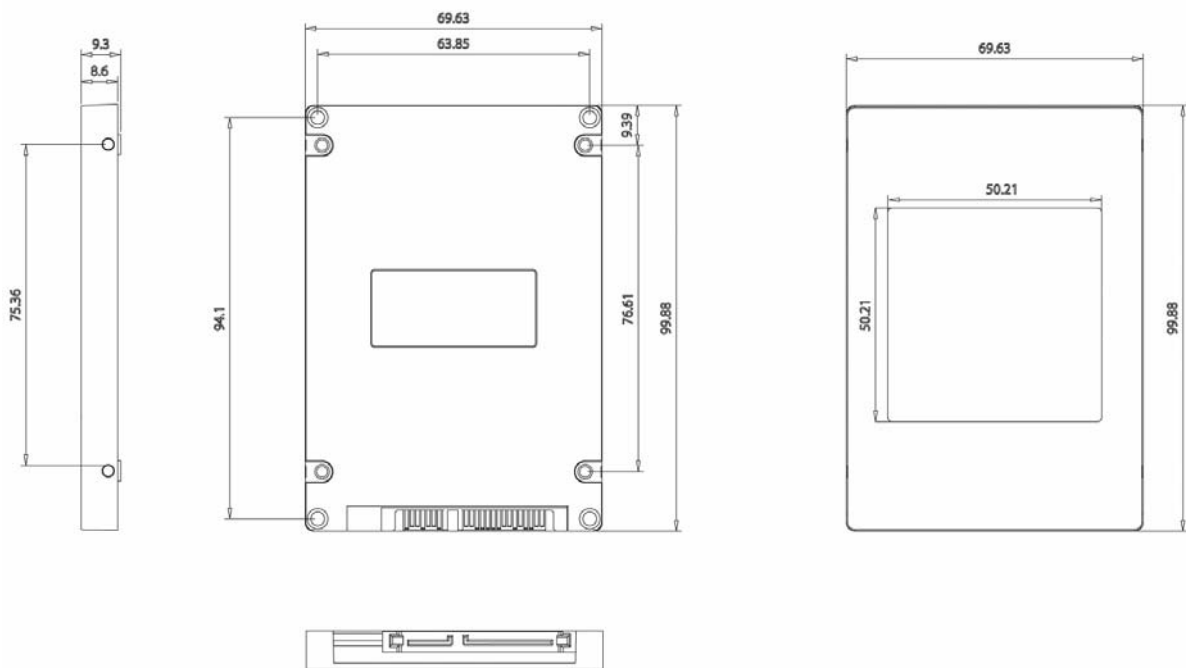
FiD 2.5 SATA 6000 mechanical dimensions
